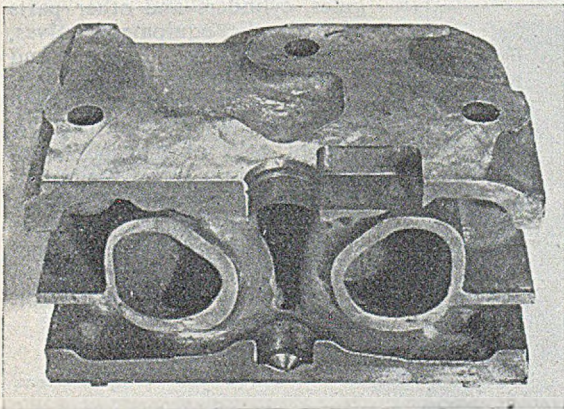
Cylinder-head weighting 2 cwt., for 8 in. bore, high-speed Diesel Engine, sectioned to show Soundness; made by Fiat Grandi Motori, Italy.
